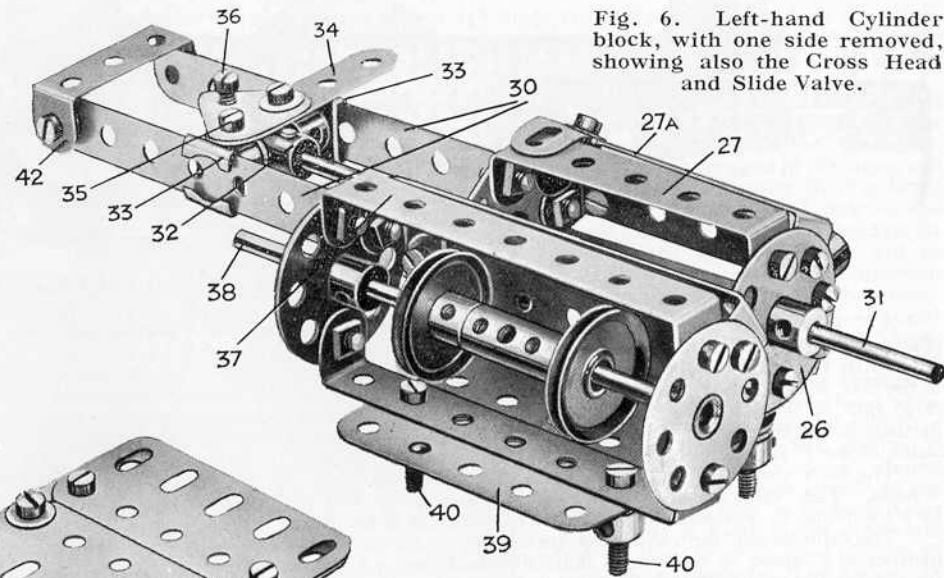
Left-hand Cylinder block, with one side removed, showing also the Cross Head and Slide Valve.
